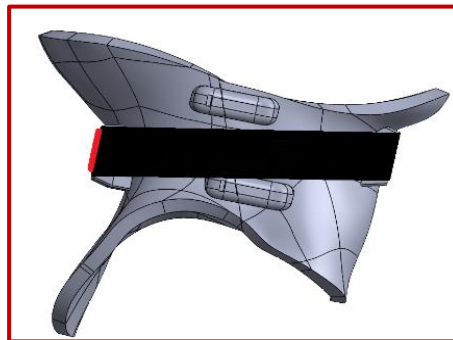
Lateral View of the Assembly of the entire Mechanism in the Collar.
